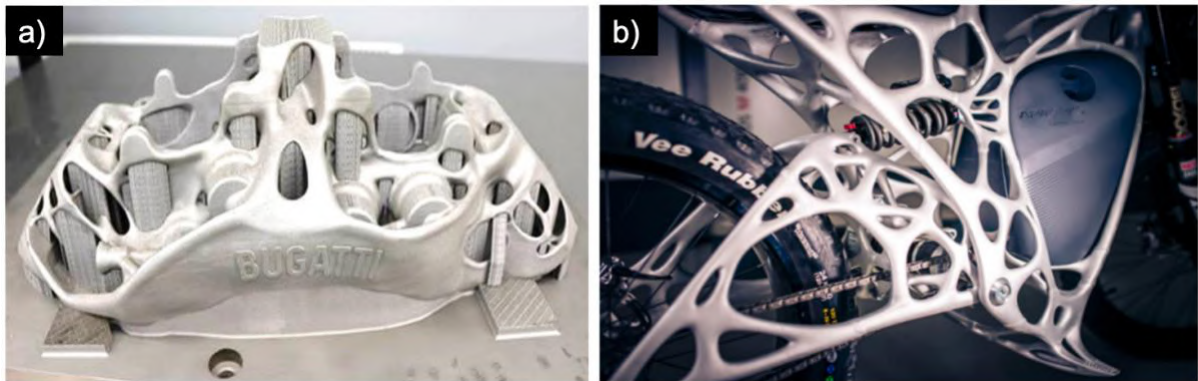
Applications of aluminium additive manufacturing through laser powder bed fusion (LPBF) technique to fabricate light weight parts such as, a) Bugatti brake calliper [6] and b) Bike frame made of Scalmalloy® [5], that were designed through topology optimisation.
